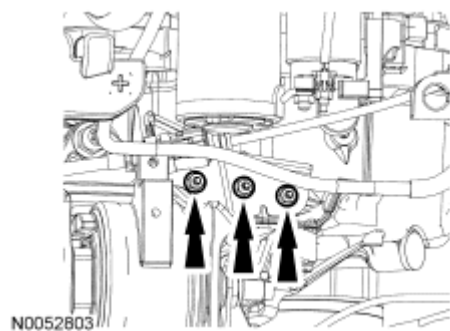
Identifying Wiring Harness Fasteners & Torque Converter Housing Stud Bolt
